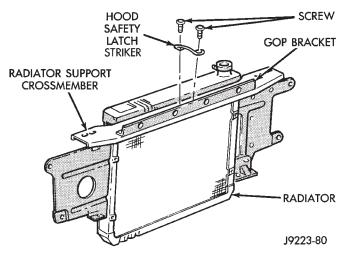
Hood Safety Latch Striker—2.5L Engine (Typical)
